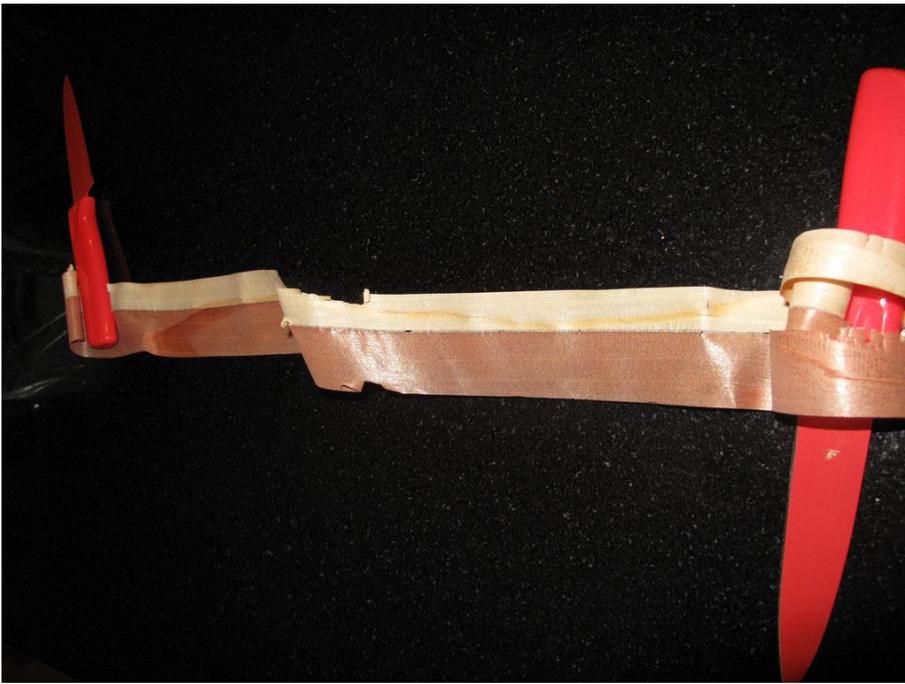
Tapering the loom blanks to the Pocock dimensions
